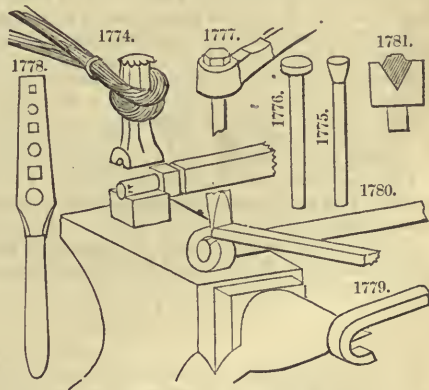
, 1776, and 1777, explain these processes of making an ordinary screw-bolt; the latter is a single tool, but the heading-tool, Fig. 1778, with several holes, is also used.
